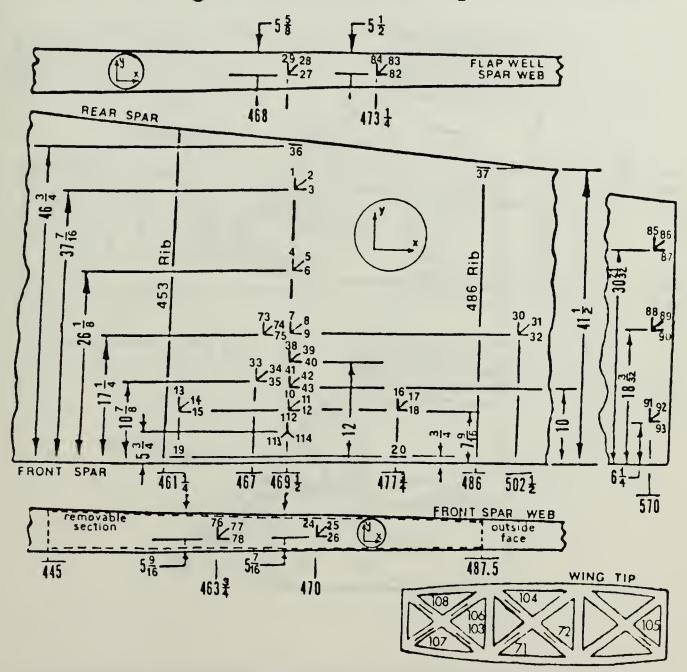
A P2V Starboard Wing, Strain Gage Locations, Top of Test Section
